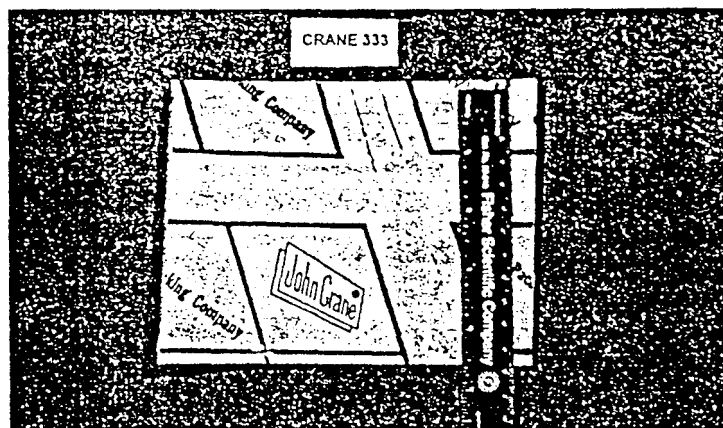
Asbestos-containing sheet gasket material of the type from which gaskets could be cut for sealing pipe flanges.
